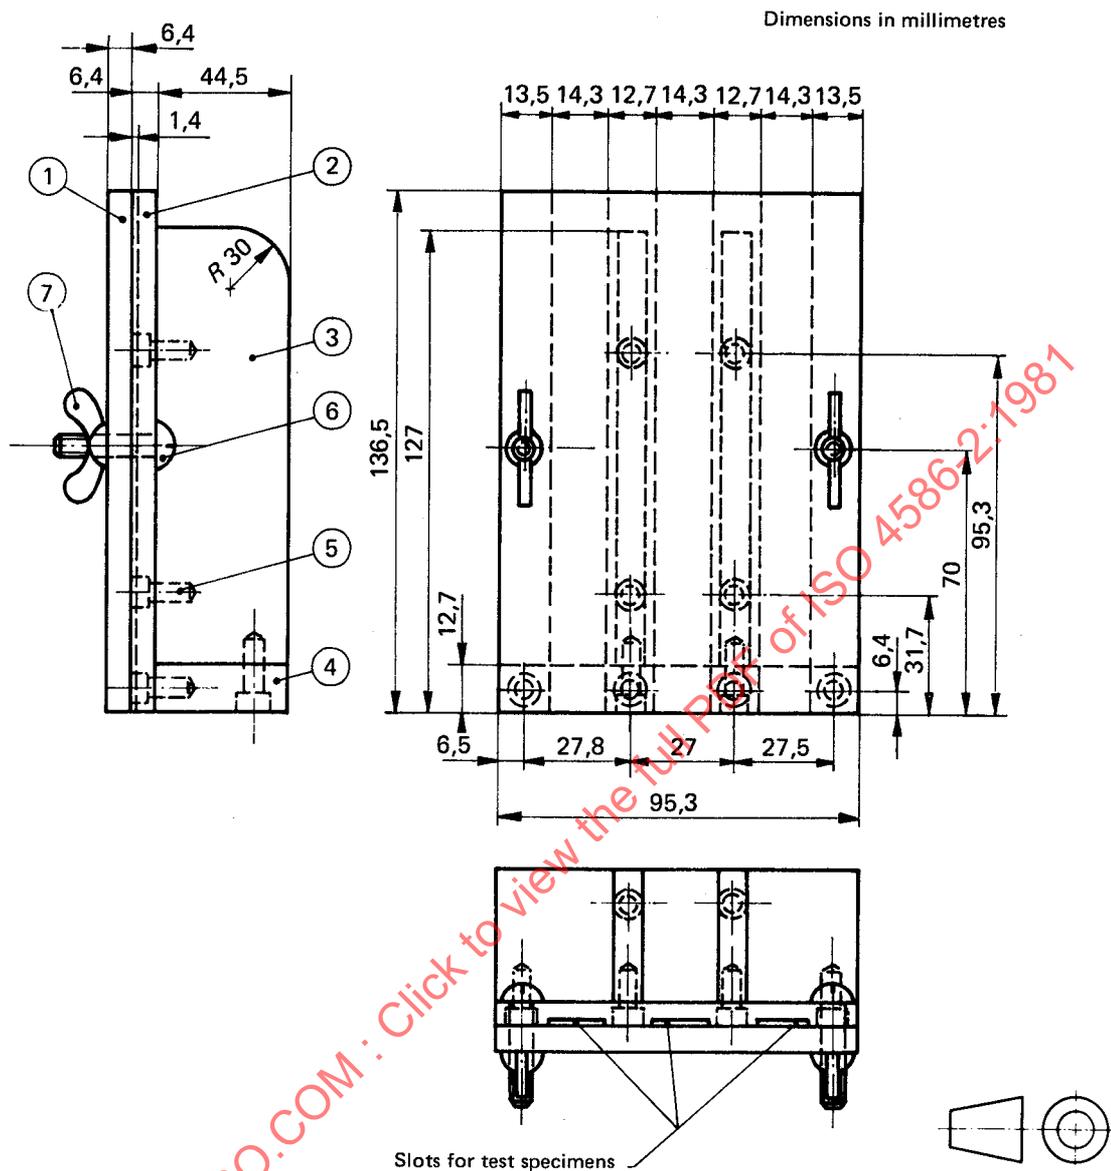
Typical holding jig for determination of dimensional change (see 9.2.5)
